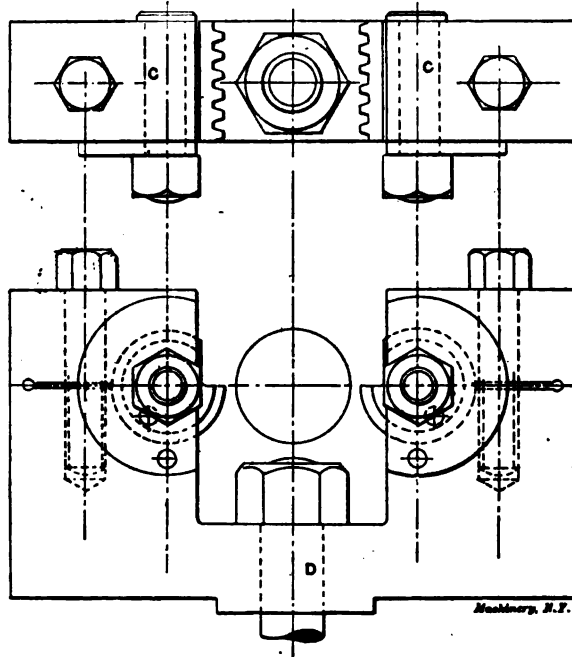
Double Tool-Post with Circular Formed Thread-Tool.
